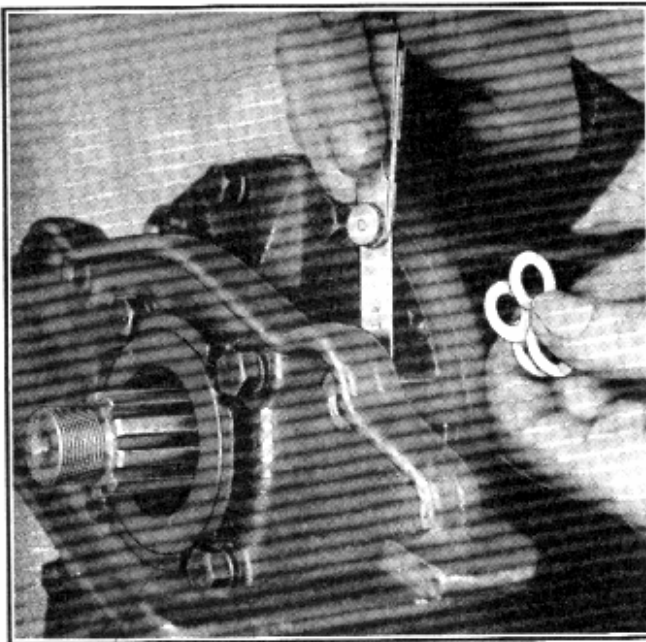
Determining Shim Thickness for Hand Brake Flange
